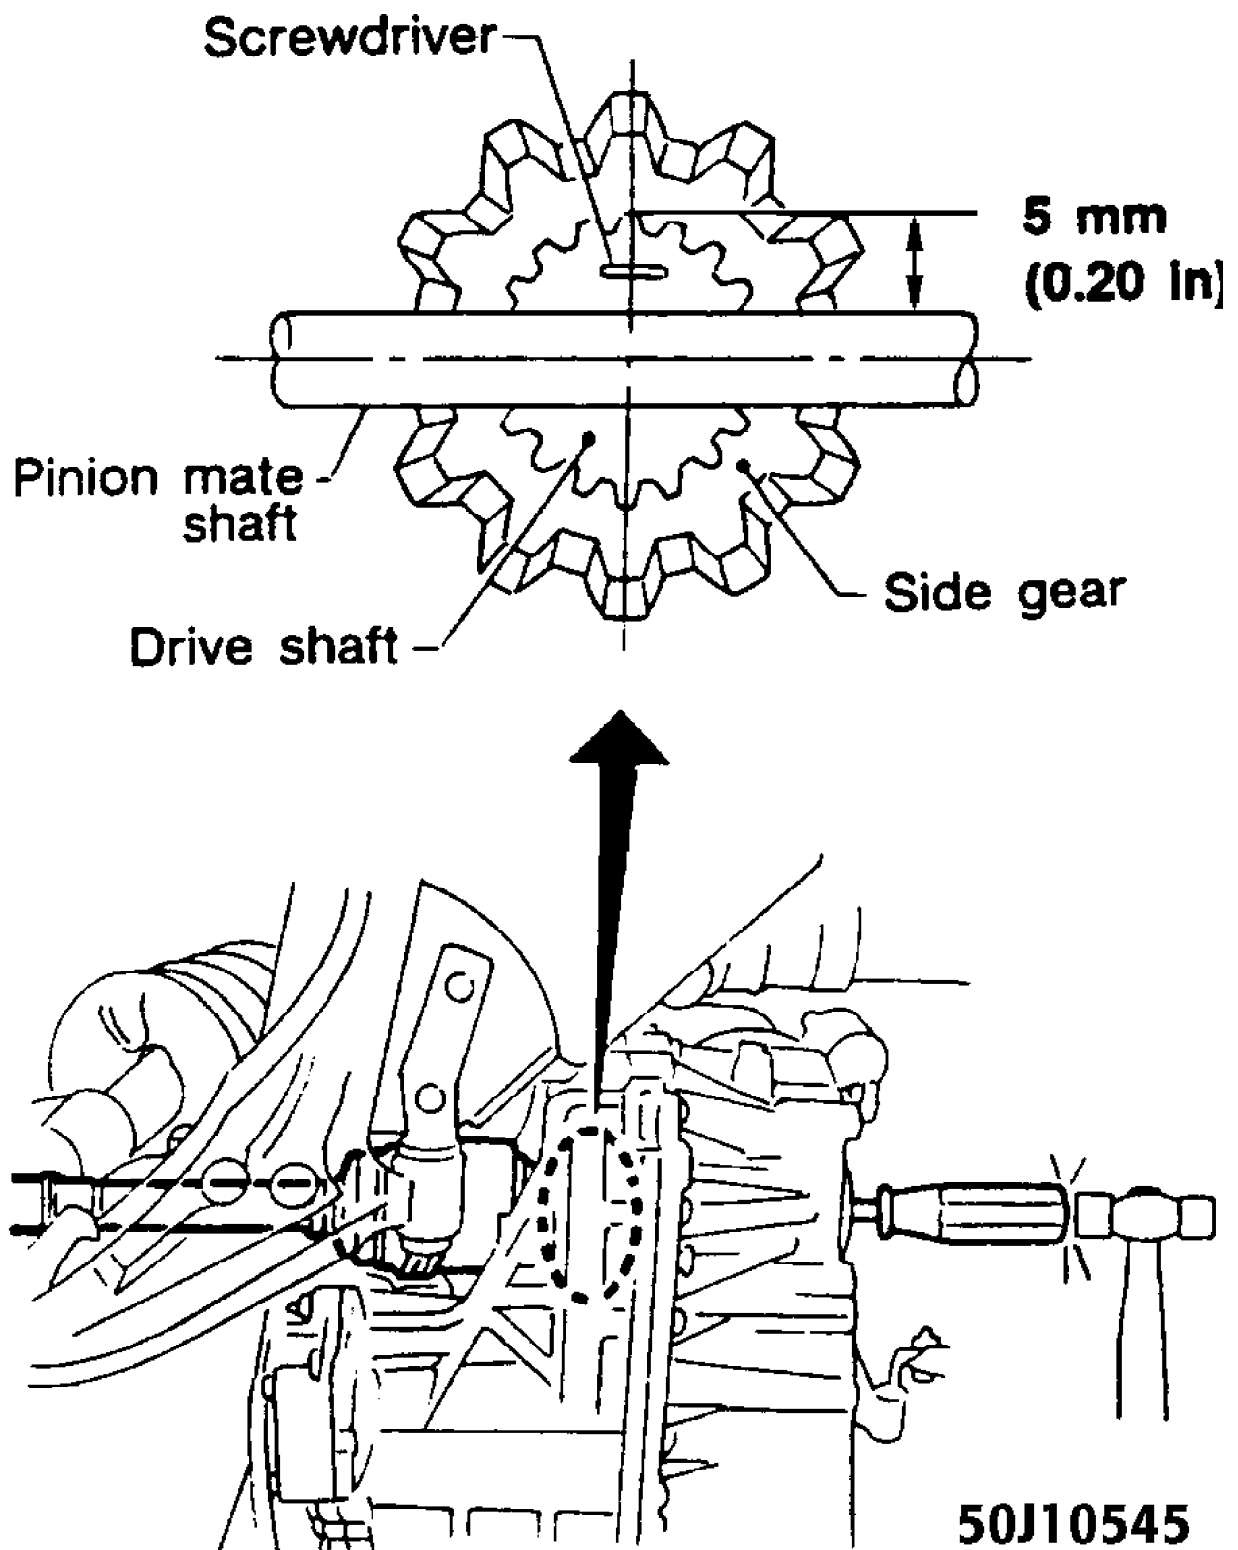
Removing Axle Shaft (A/T Left Shaft)
